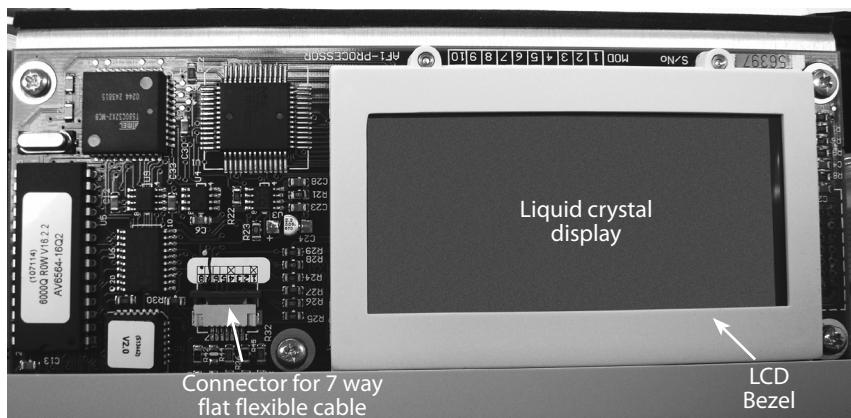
View of the Processor PCB assembly and Liquid Crystal Display
